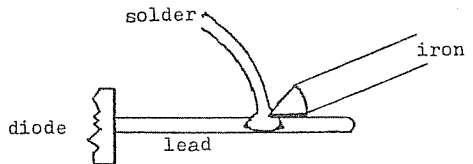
fig. B. Apply solder simultaneously to the diode lead and to the soldering iron tip.
